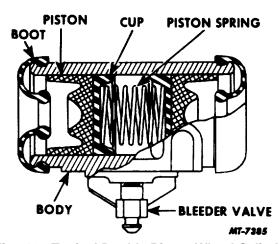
Typical Double Piston Wheel Cylinder (Cross Sectional View).
